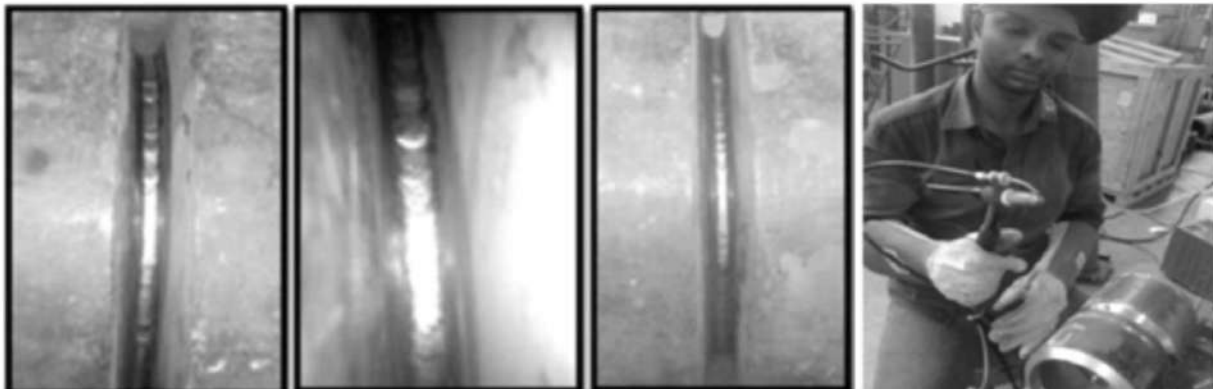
Root pass welding by Tip TIG Process
